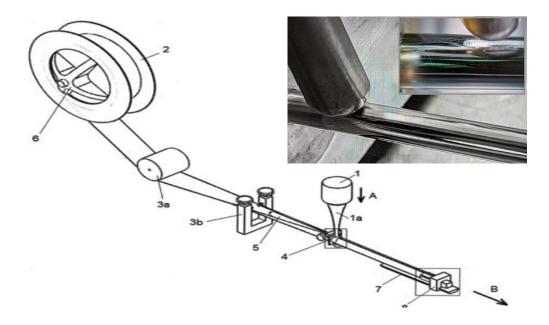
Schematic view of the welding machine [4], [5] and zoomed photos of the welding process.
